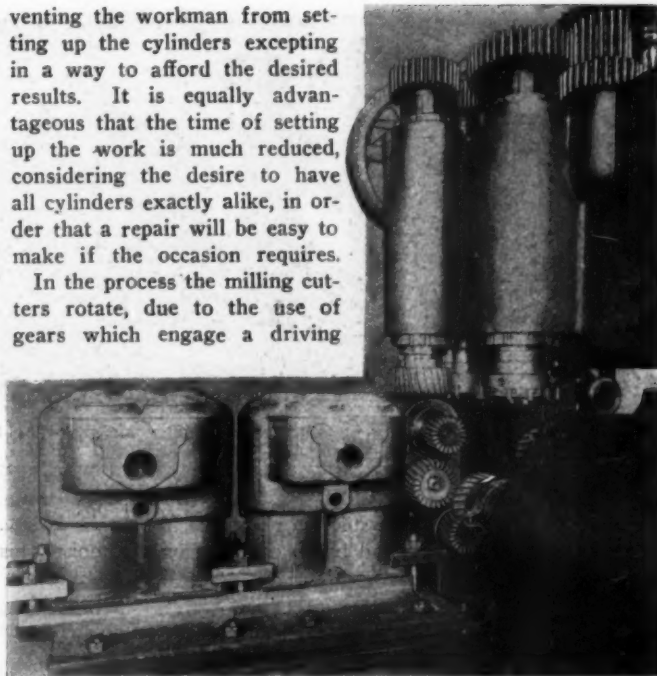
Milling planers engaged in facing two sets of twin cylinders, and engaging nine milling cutters simultaneously
